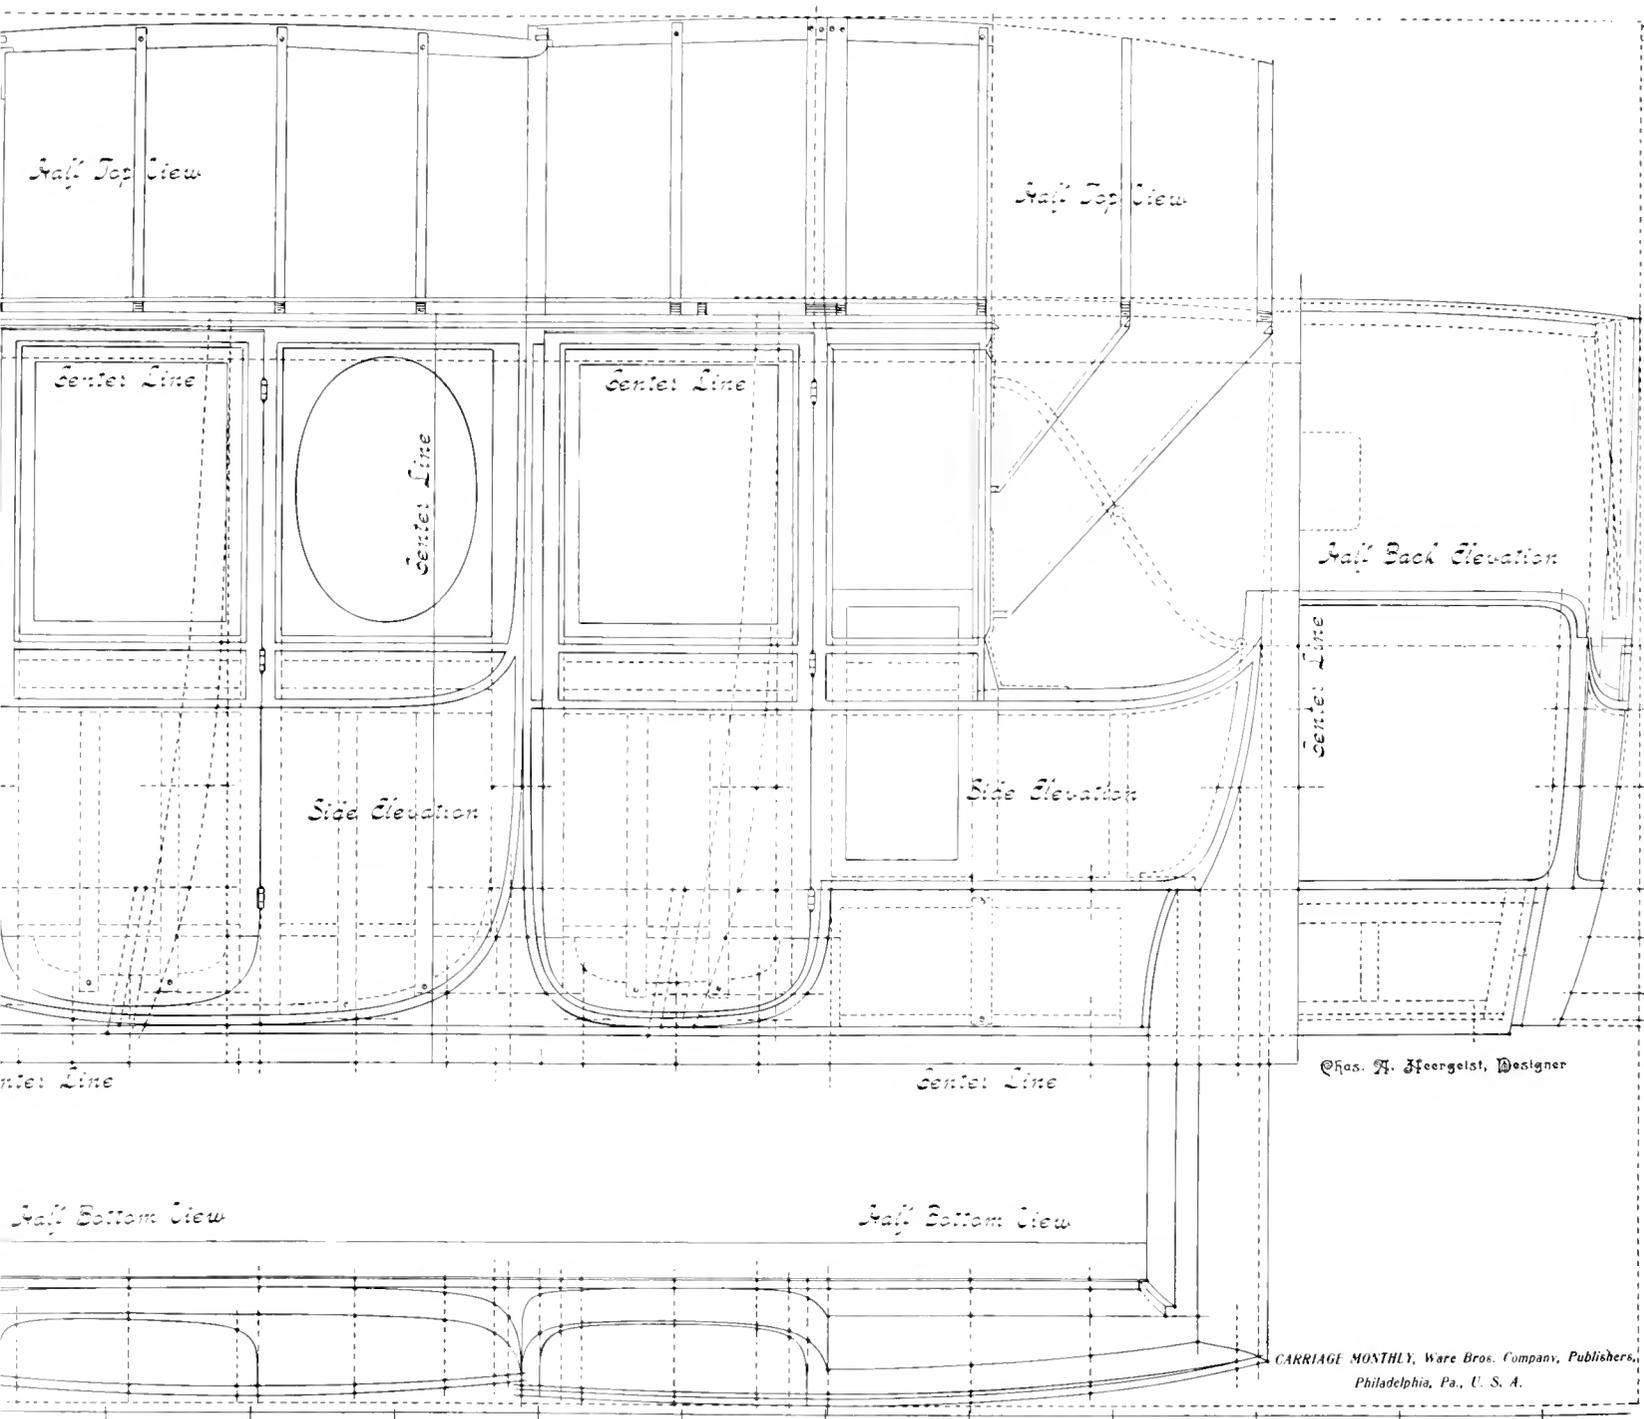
PLAN OF AN EXTENSION-FRONT BROUGHAM BODY, SHOWING SIDE ELEVATION, HALF FRONT AND HALF BACK ELEVATION AND BOTTOM VIEW.
